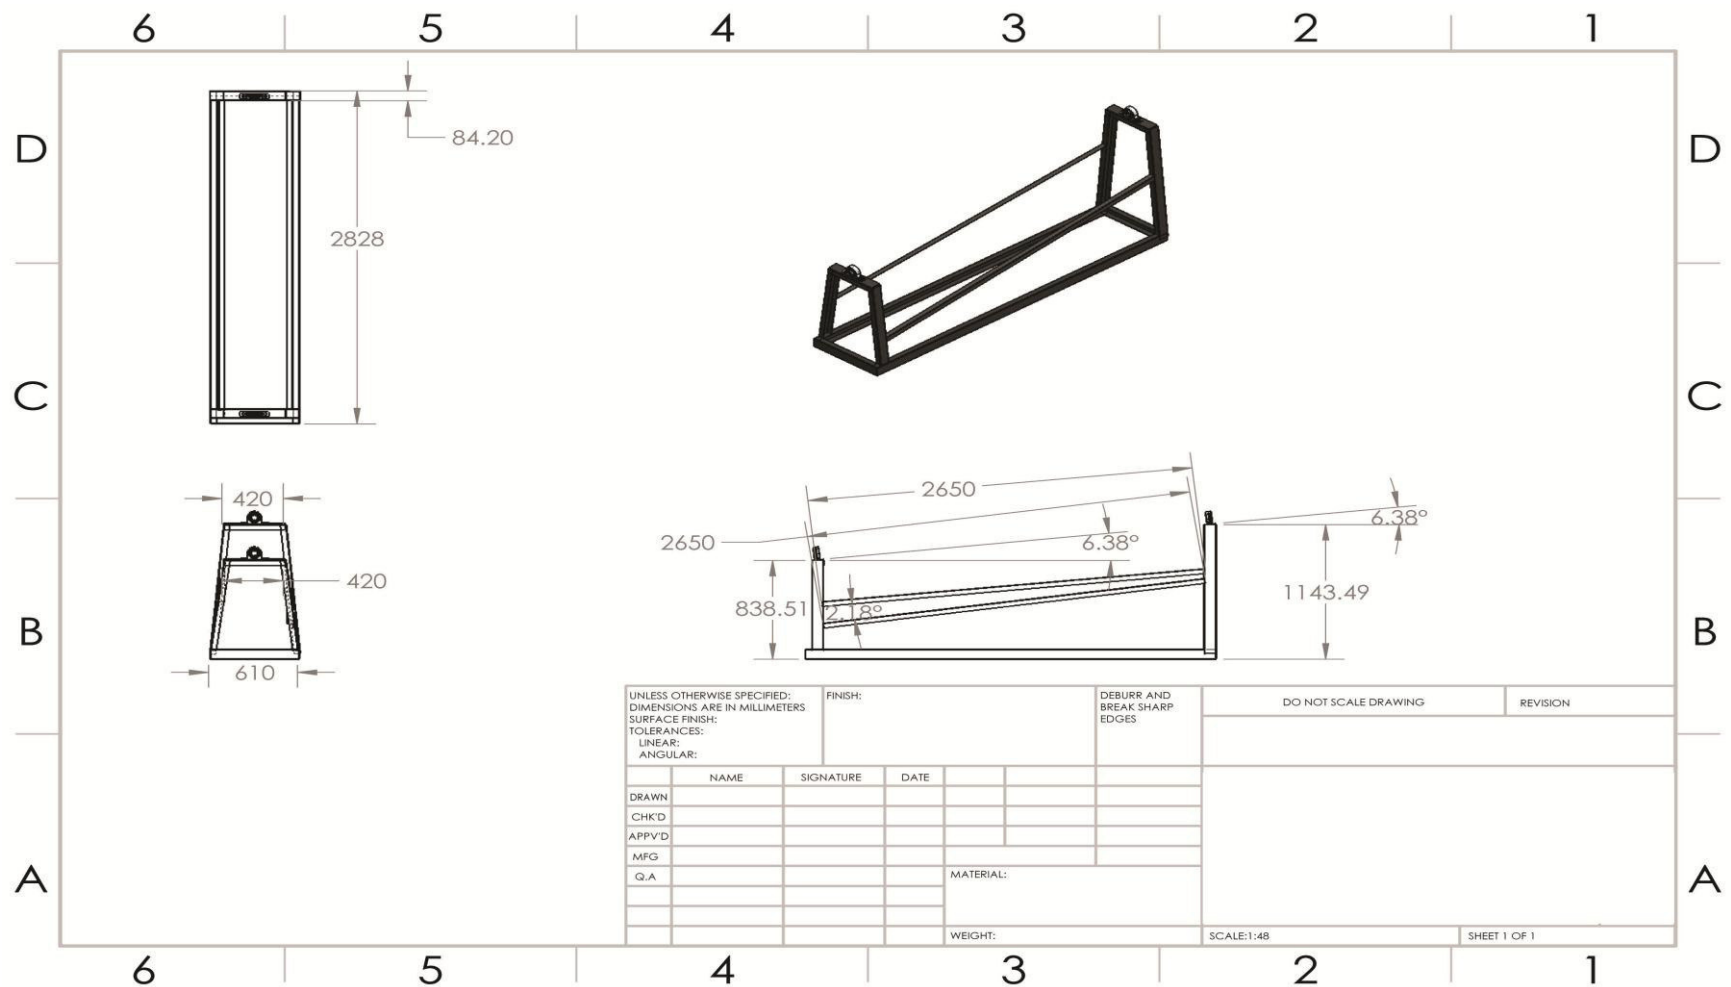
Engineering drawing of the frame (Dimensions are in mm)
